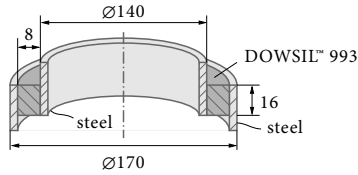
DOWSIL™ 993 tubular lap joint specimen. Dimensions in mm.
